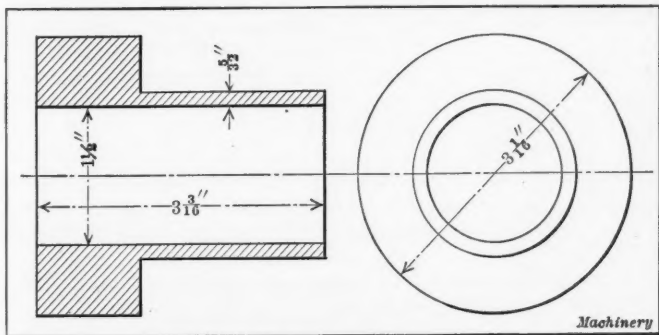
Example of Work handled by Cleveland Rotary Tilting Magazine
